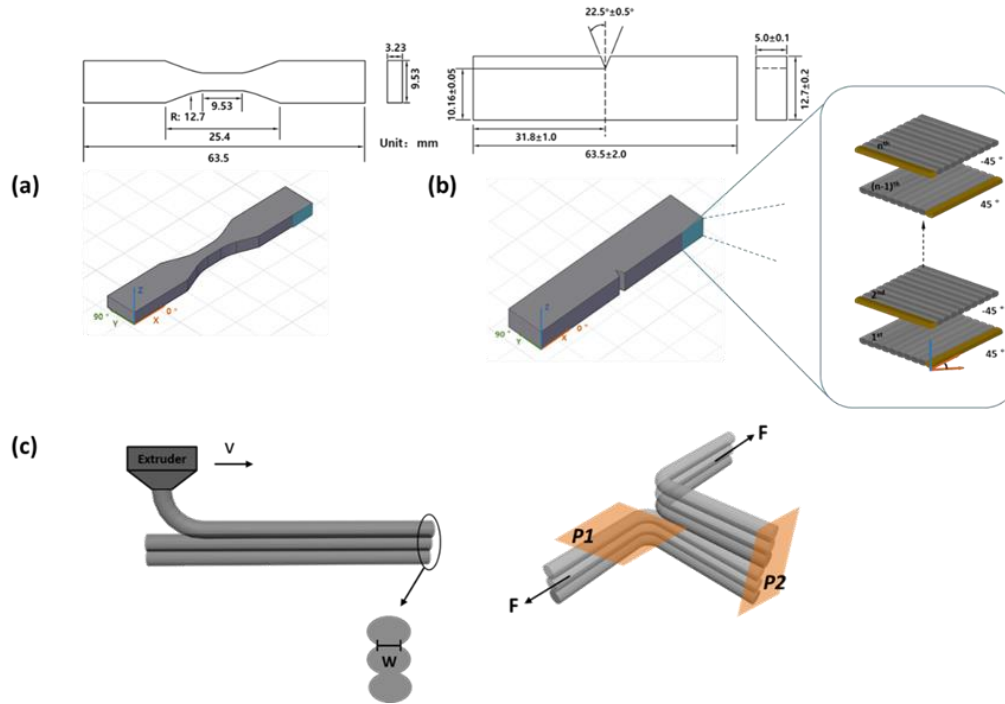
Specimens standard for (a) tensile, (b) Izod impact, and (c) tear test.
